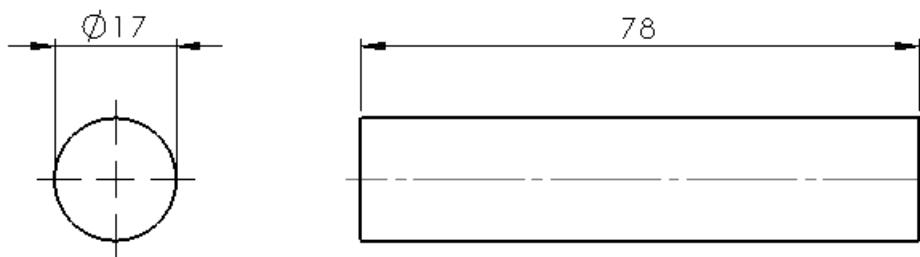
Fatigue Test Specimen CAD Drawing (Dimensions in mm)
